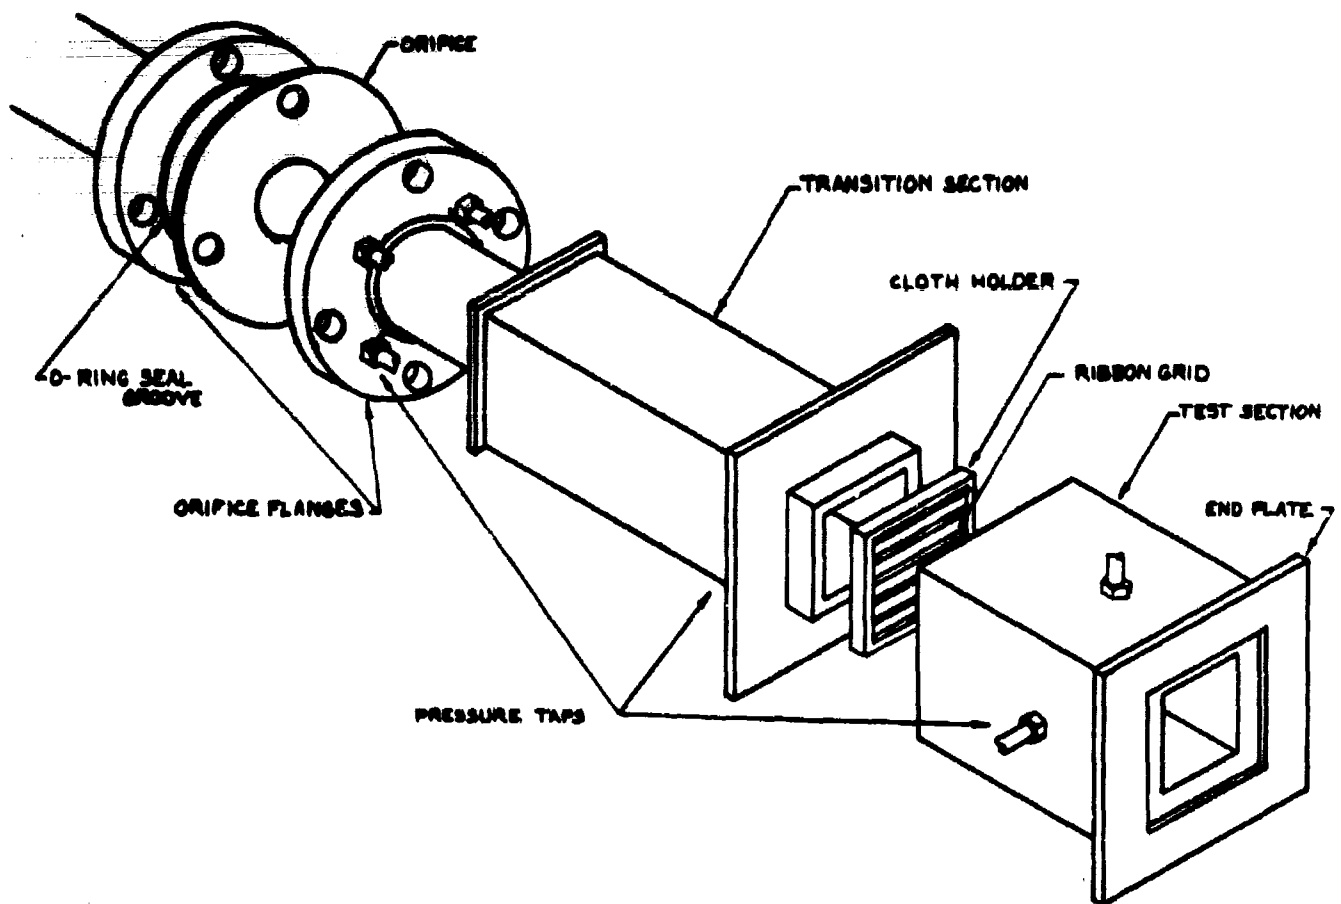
EXPLODED VIEW OF FLOWMETER TRANSITION SECTION AND TEST SECTION
